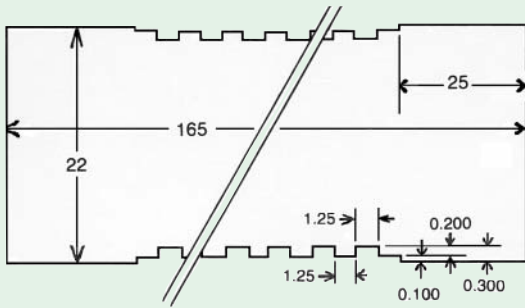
Details from the engineering drawing. Dimensions are in millimeters. Plastic arms are illustrated in Fig. 1 above.
